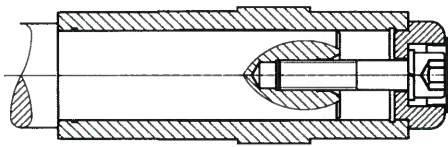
Gear unit mounted to shaft with a shoulder using the fastening element
